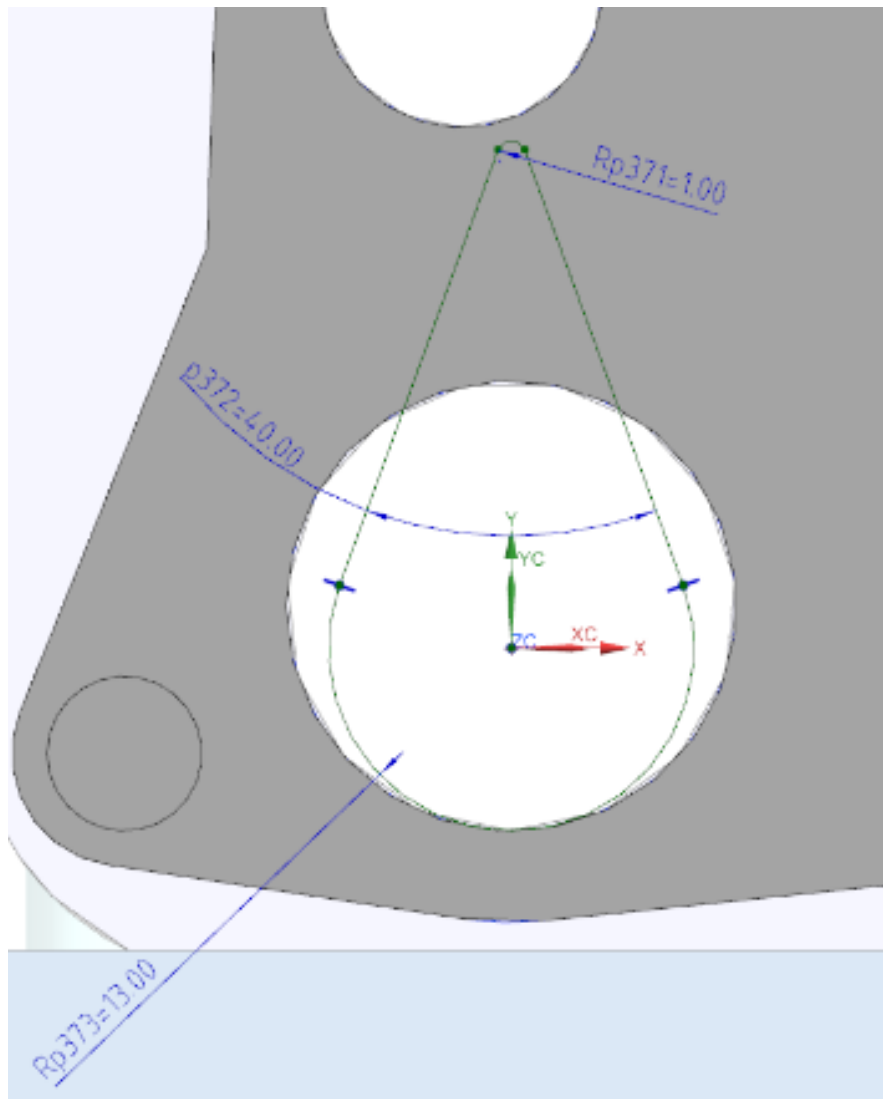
Sketch of droplet shape that is used in channels. The bottom radius (13mm) in the picture is free to be changed.
